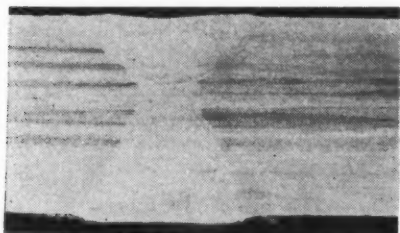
Sound weld made on parent steel of poor welding qualities
